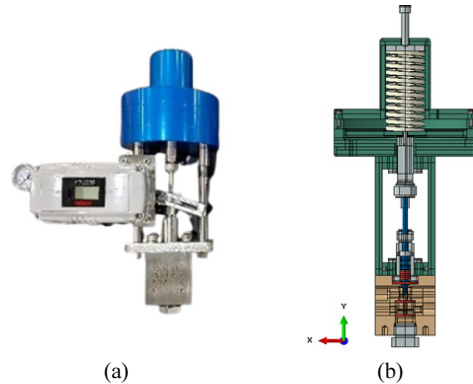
Flow control valve (HIFLUX®). (a) Test product. (b) Assembly.
